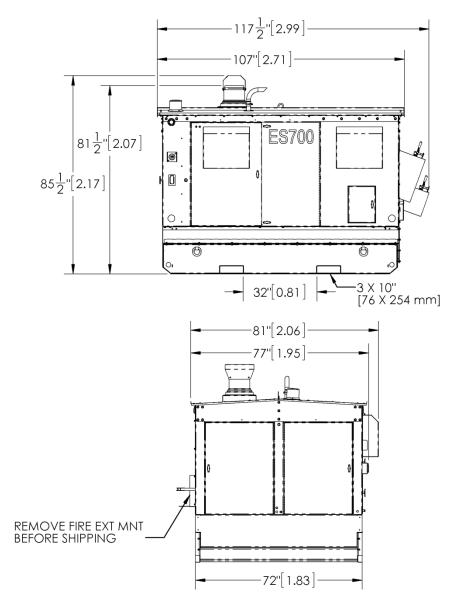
Machine dimensions mounted on Skid PN 101590. Dimensions are in inches [meters] unless noted.
